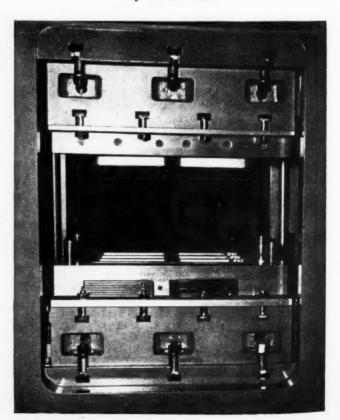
Six-cavity Mold in a Hydraulic Press which Produces Accelerator Pedals from Soy Bean Pellets
